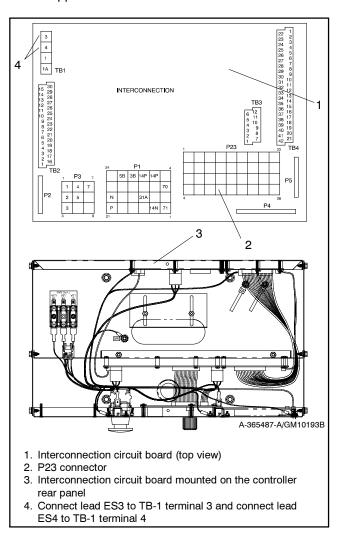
Attaching Wiring Connection Harness to Controller Circuit Board
